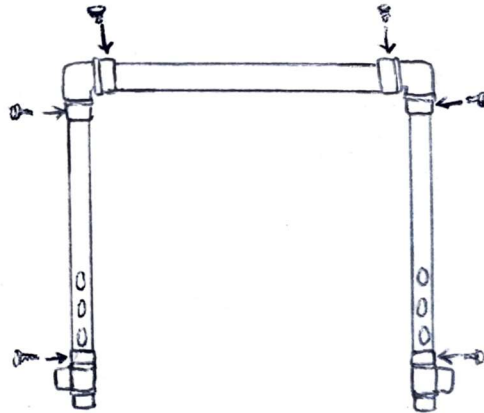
Drill hole and screws along upper clothing hanger piece.
